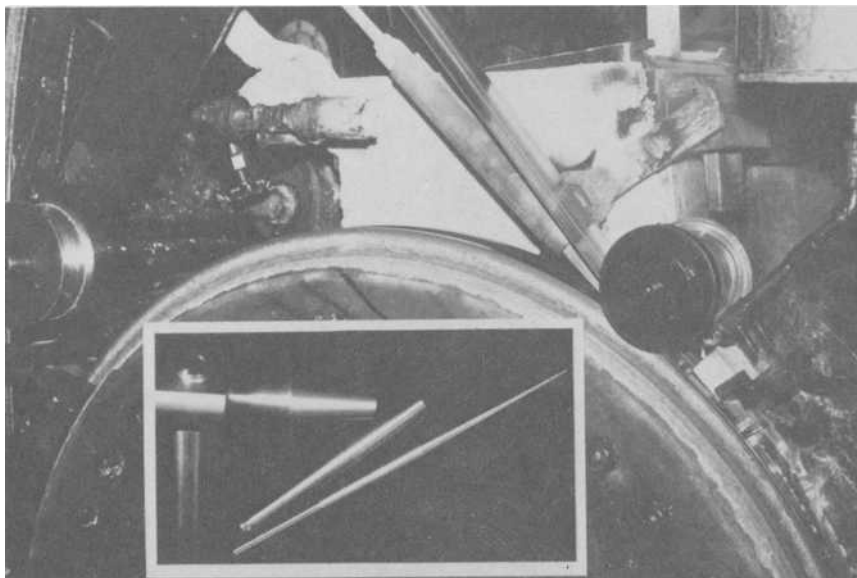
Properzi continuous casting wirebar machine showing metering valve assembly and Mo-30W components (inset).
